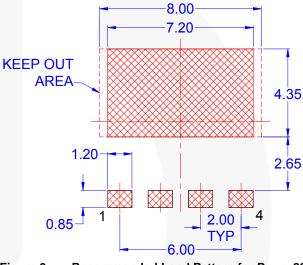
Recommended Land Pattern for Power88 (Dimensions are in millimeters)
